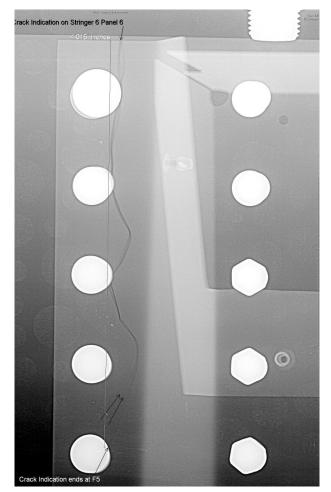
Example stringer crack detected during posttanking test x-ray inspection.
